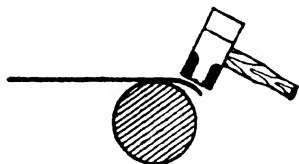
BENDING THE END OF A PLATE ON A ROLL
